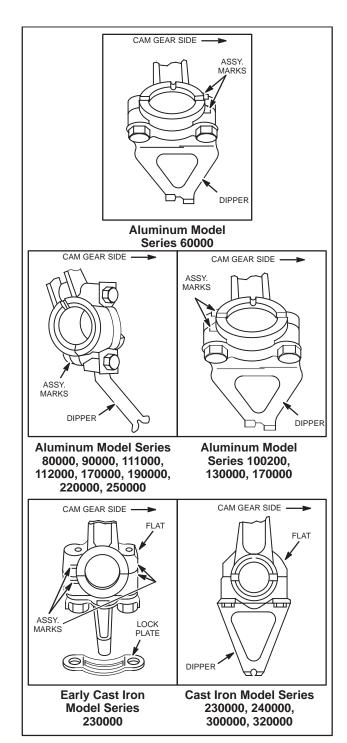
CONNECTING ROD INSTALLATION, HORIZONTAL CRANKSHAFT ENGINES
